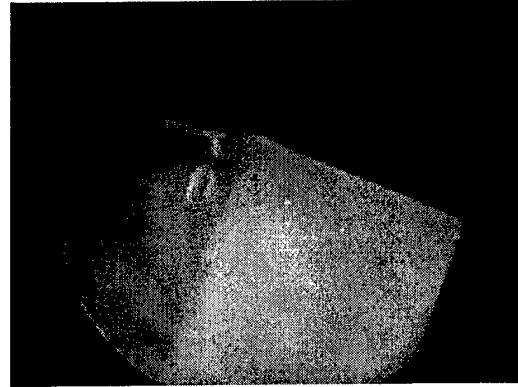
D. 36x Somos 8110 Dimples and fracture surface
